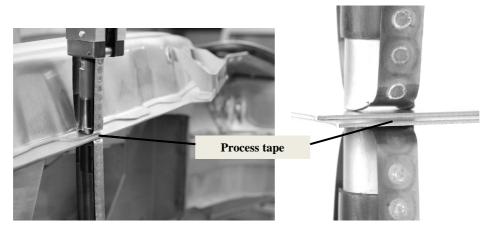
Process tape of DeltaSpot welding, elaborated based on [9]
